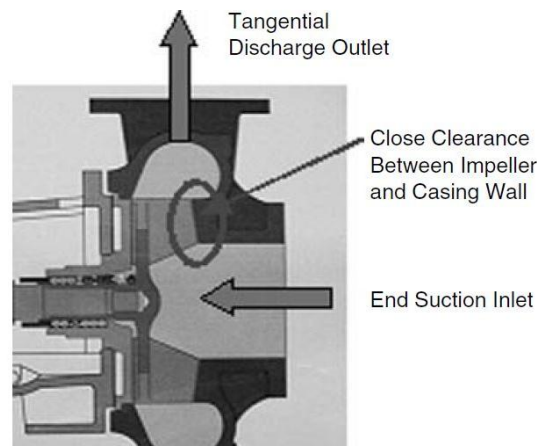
b: Tight tolerance casing serves as front of open style impeller
